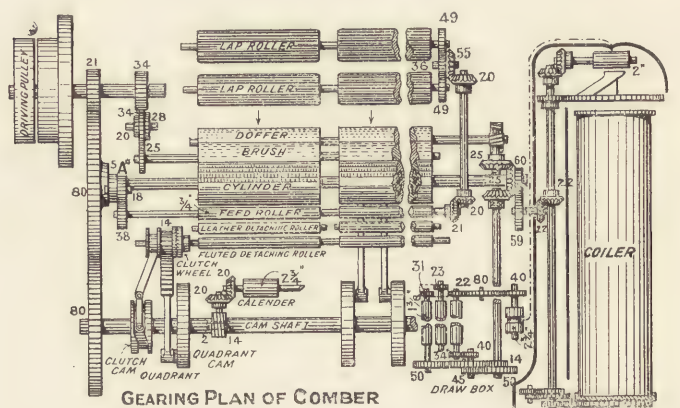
GEARING PLAN OF A PART OF THE COMBER COMBINED WITH SECTIONAL ELEVATION OF COILER AND CAN.
